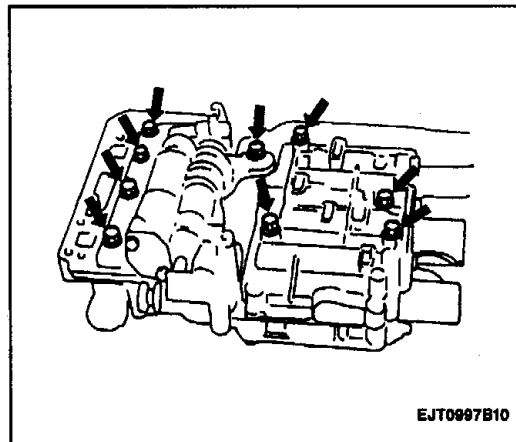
Upper Valve Body Bolt Location (03-72LE, 4-Speed)
